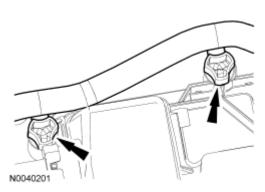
Locating Fuel Injector Electrical Connectors Courtesy of FORD MOTOR CO.
